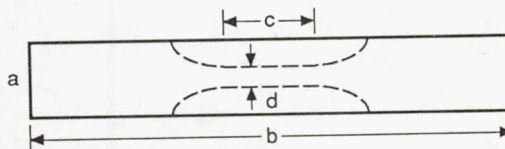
Tensile specimen geometries. Nominal specimen thickness, 2mm. (Dimensions in centimeters).
